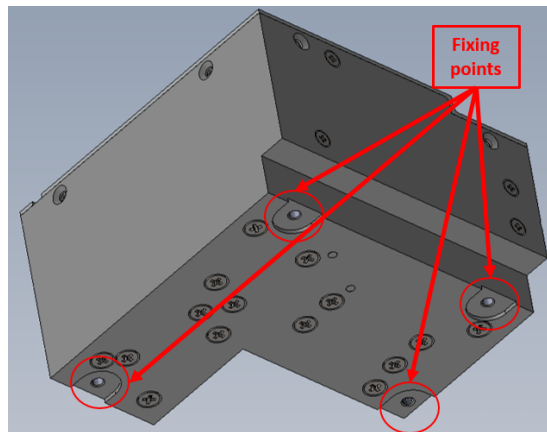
CubeCAT laser engine mechanical casing bottom view.
